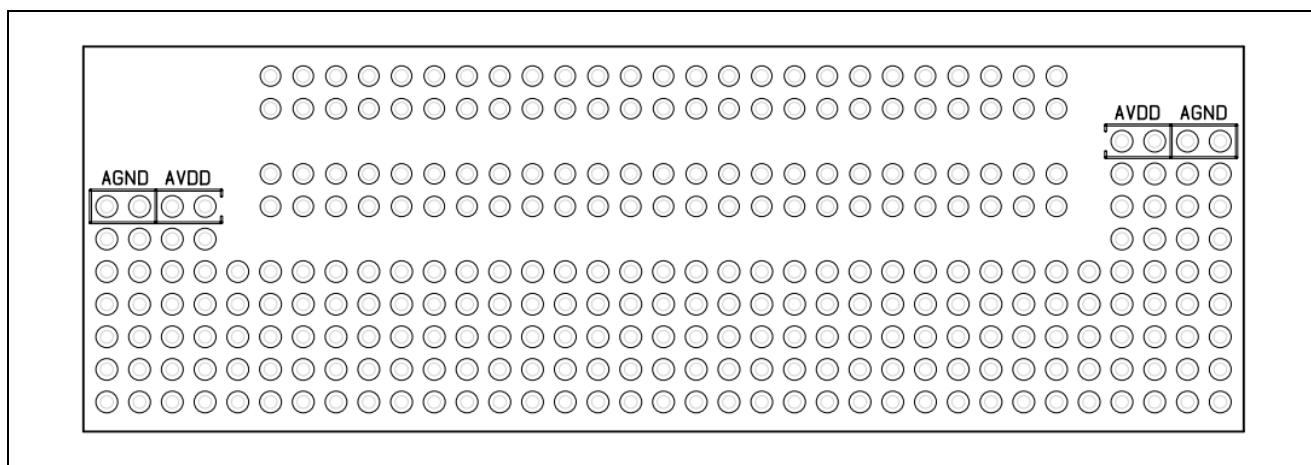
TSA-EXT BOARD Component Layout (Back)
